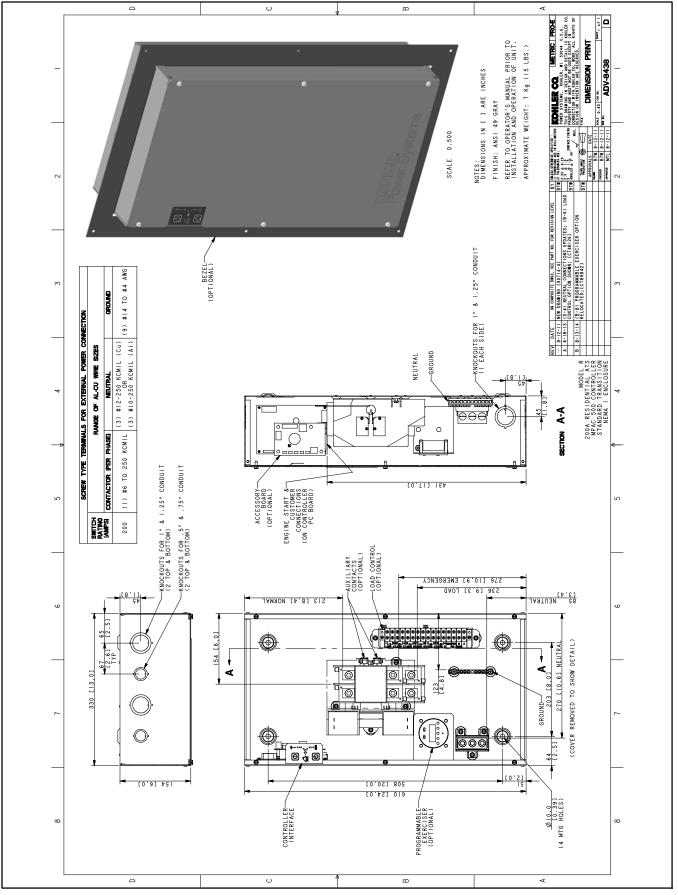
Dimension Drawing, 200 Amp NEMA Type 1 Enclosure without Load Center, ADV-8438
